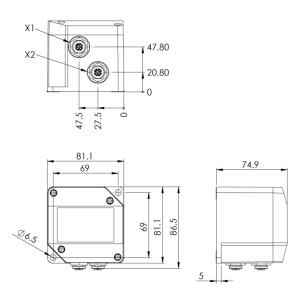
EN-96 dimensions (all dimensions in millimetres)
